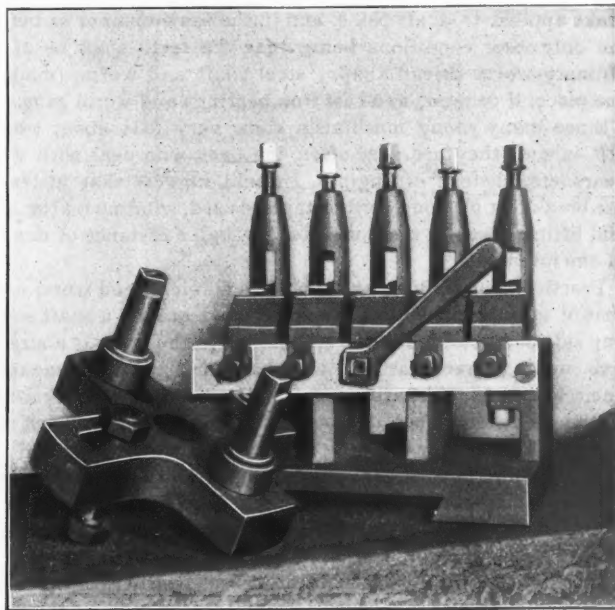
CONE PULLEY TURNING FIXTURE.
